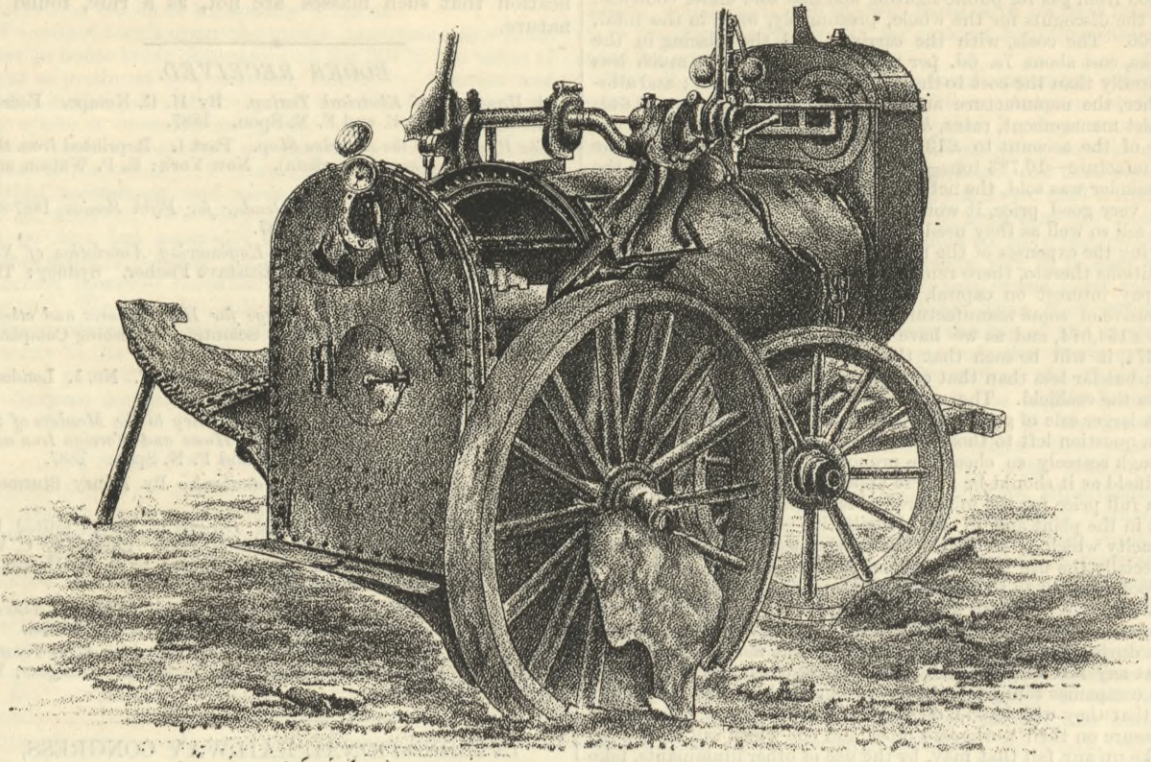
RIGHT SIDE VIEW OF THE ENGINE AFTER THE EXPLOSION.
